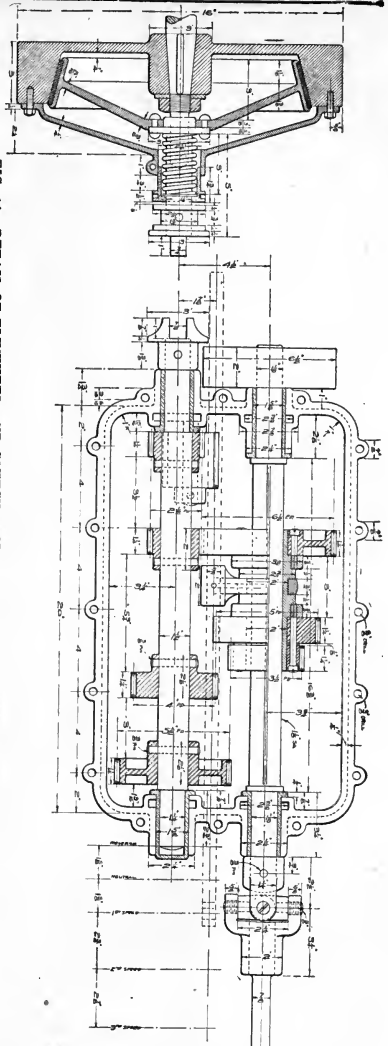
DETAIL OF FLYWHEEL AND CLUTCH, AND PLAN VIEW OF CHANGE GEAR CASE.. FIG. 15.
